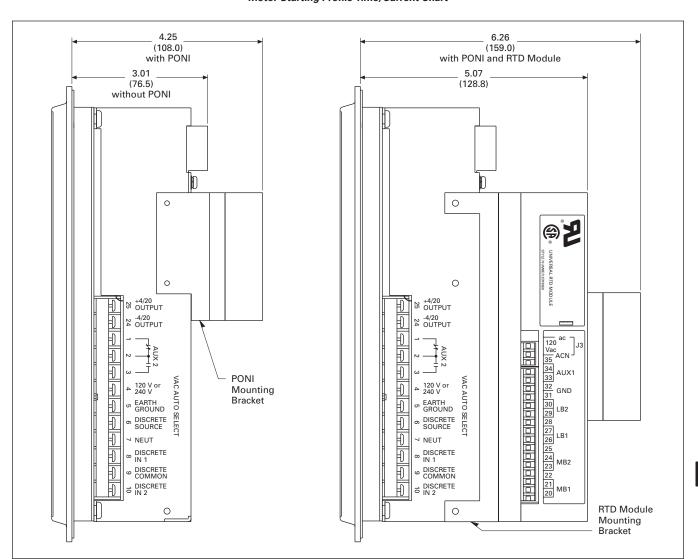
MP-3000 PONI and URTD Mounting — Dimensions in Inches (mm)
